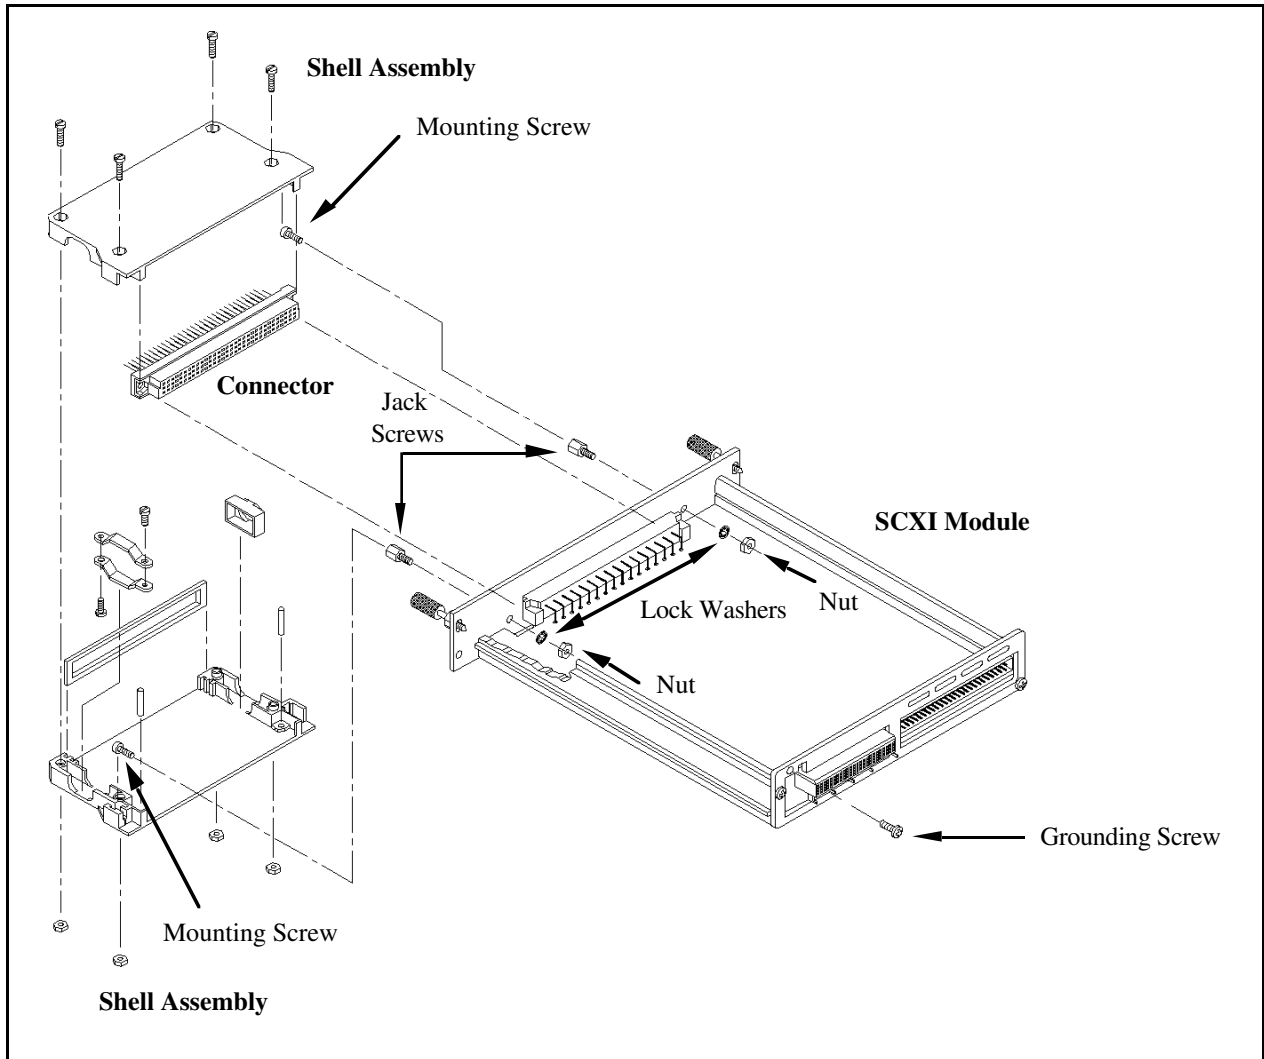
Building and Mounting the SCXI-1310 or SCXI-1330 Connector-and-Shell Assembly
